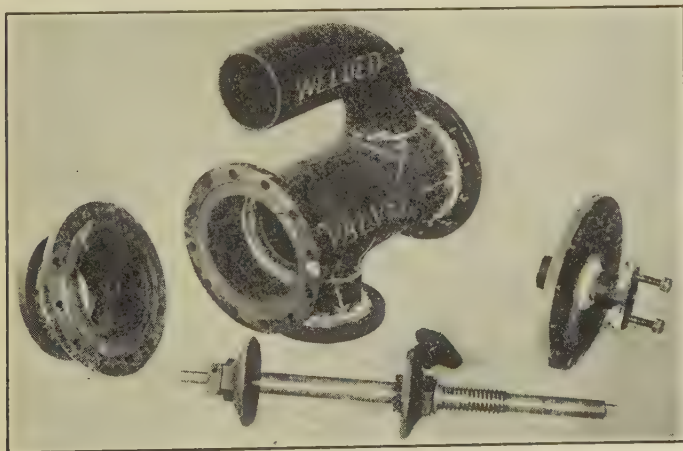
Arc-welded 4½-in. change valve tested to 300 lb. hydrostatic pressure. Savings in cost of labor and material, exclusive of patterns, 3.7 per cent.
